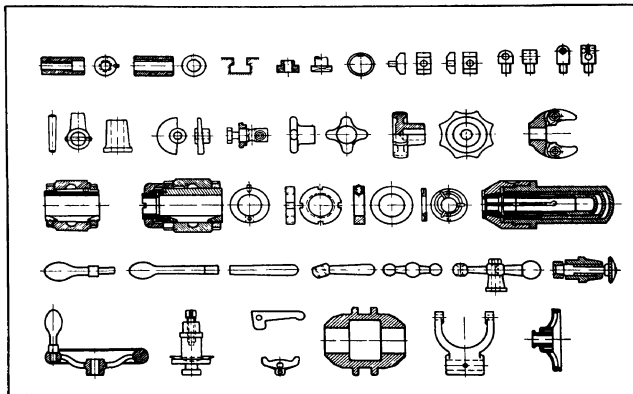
INTERNAL STANDARDS OF A MACHINE-TOOL WORKS
